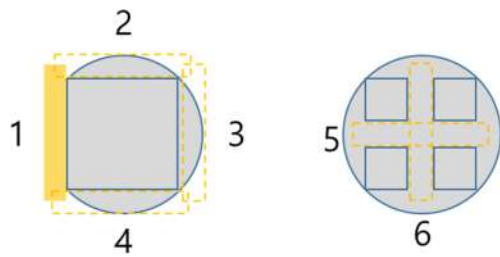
Fabrication procedure of multi-tool (outer four sides machining: steps 1 to 4, cross shape machining: steps 5 to 6)
